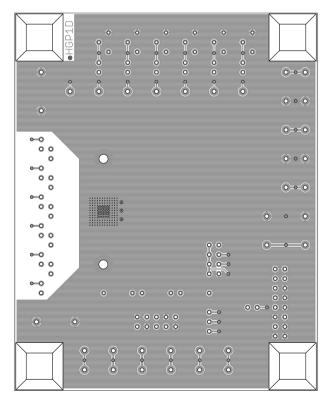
Evaluation board (solder side) with mounting option for heat sink
